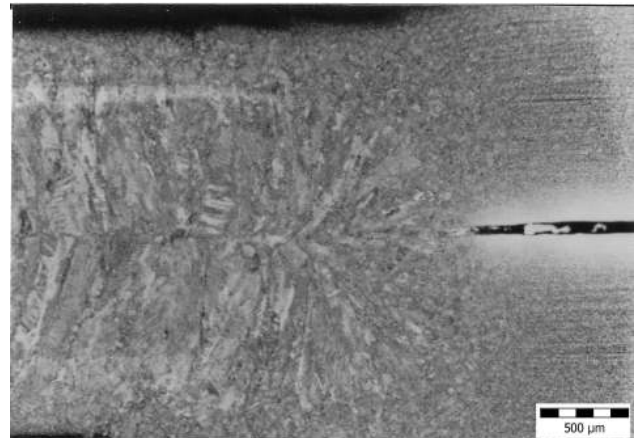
Weld nugget and heat affected zone of sample F.
